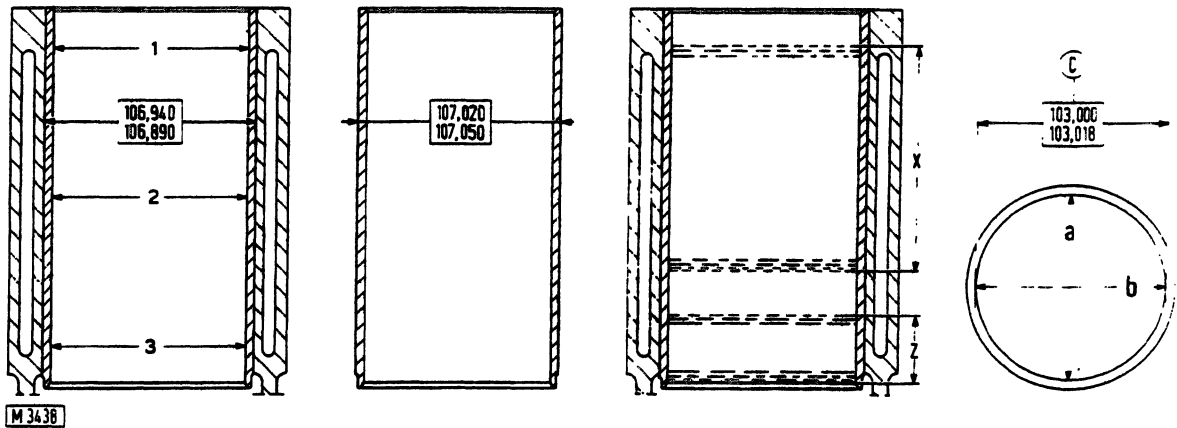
Standard dimensions (mm) of cylinder sleeves and seats in the block, and checking sleeve wear.
